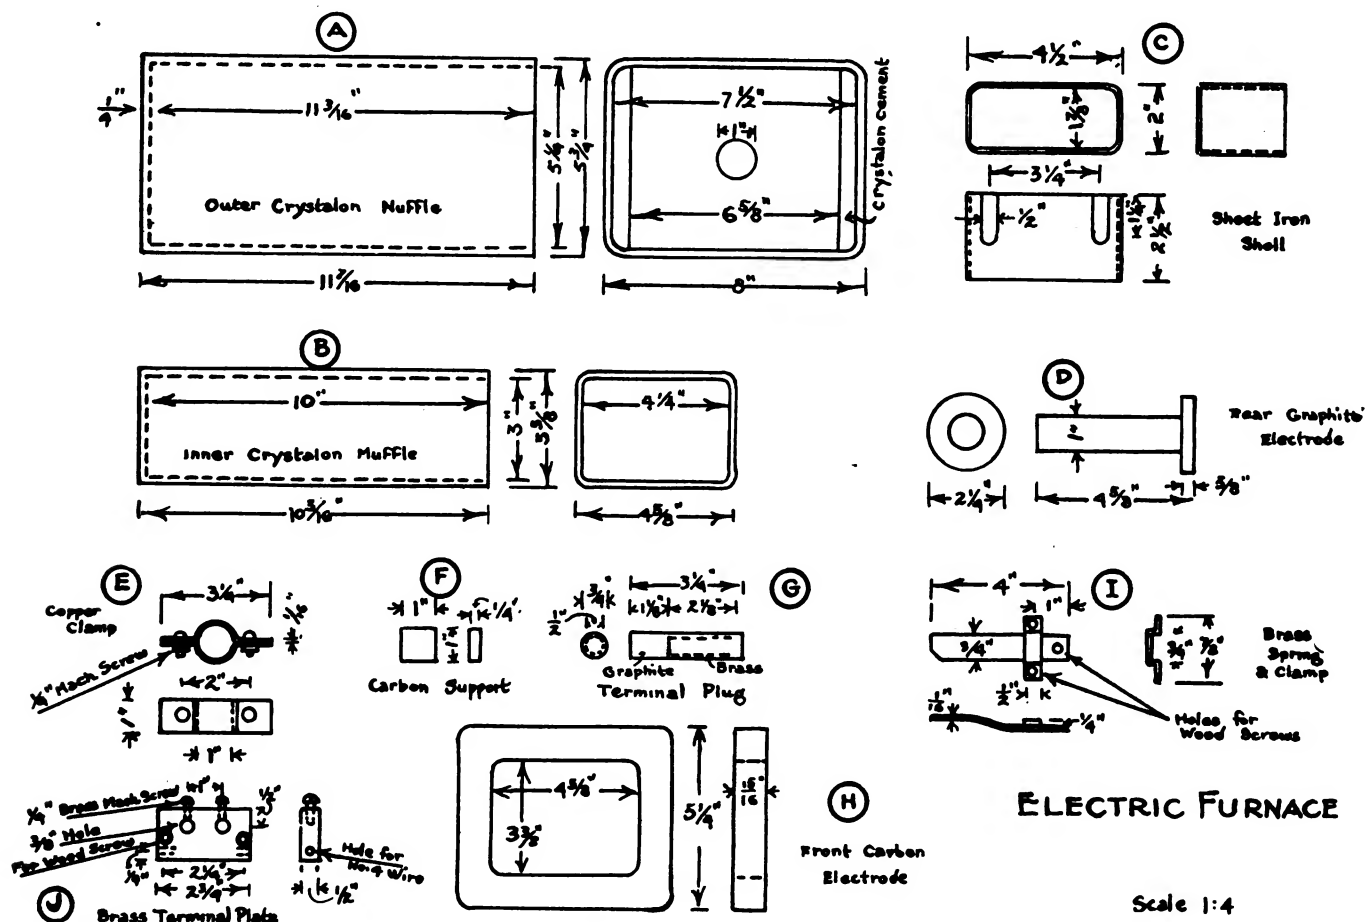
DETAILS OF THE FURNACE PARTS BEFORE ASSEMBLING, SHOWING DIMENSIONS AND SPECIFICATIONS
